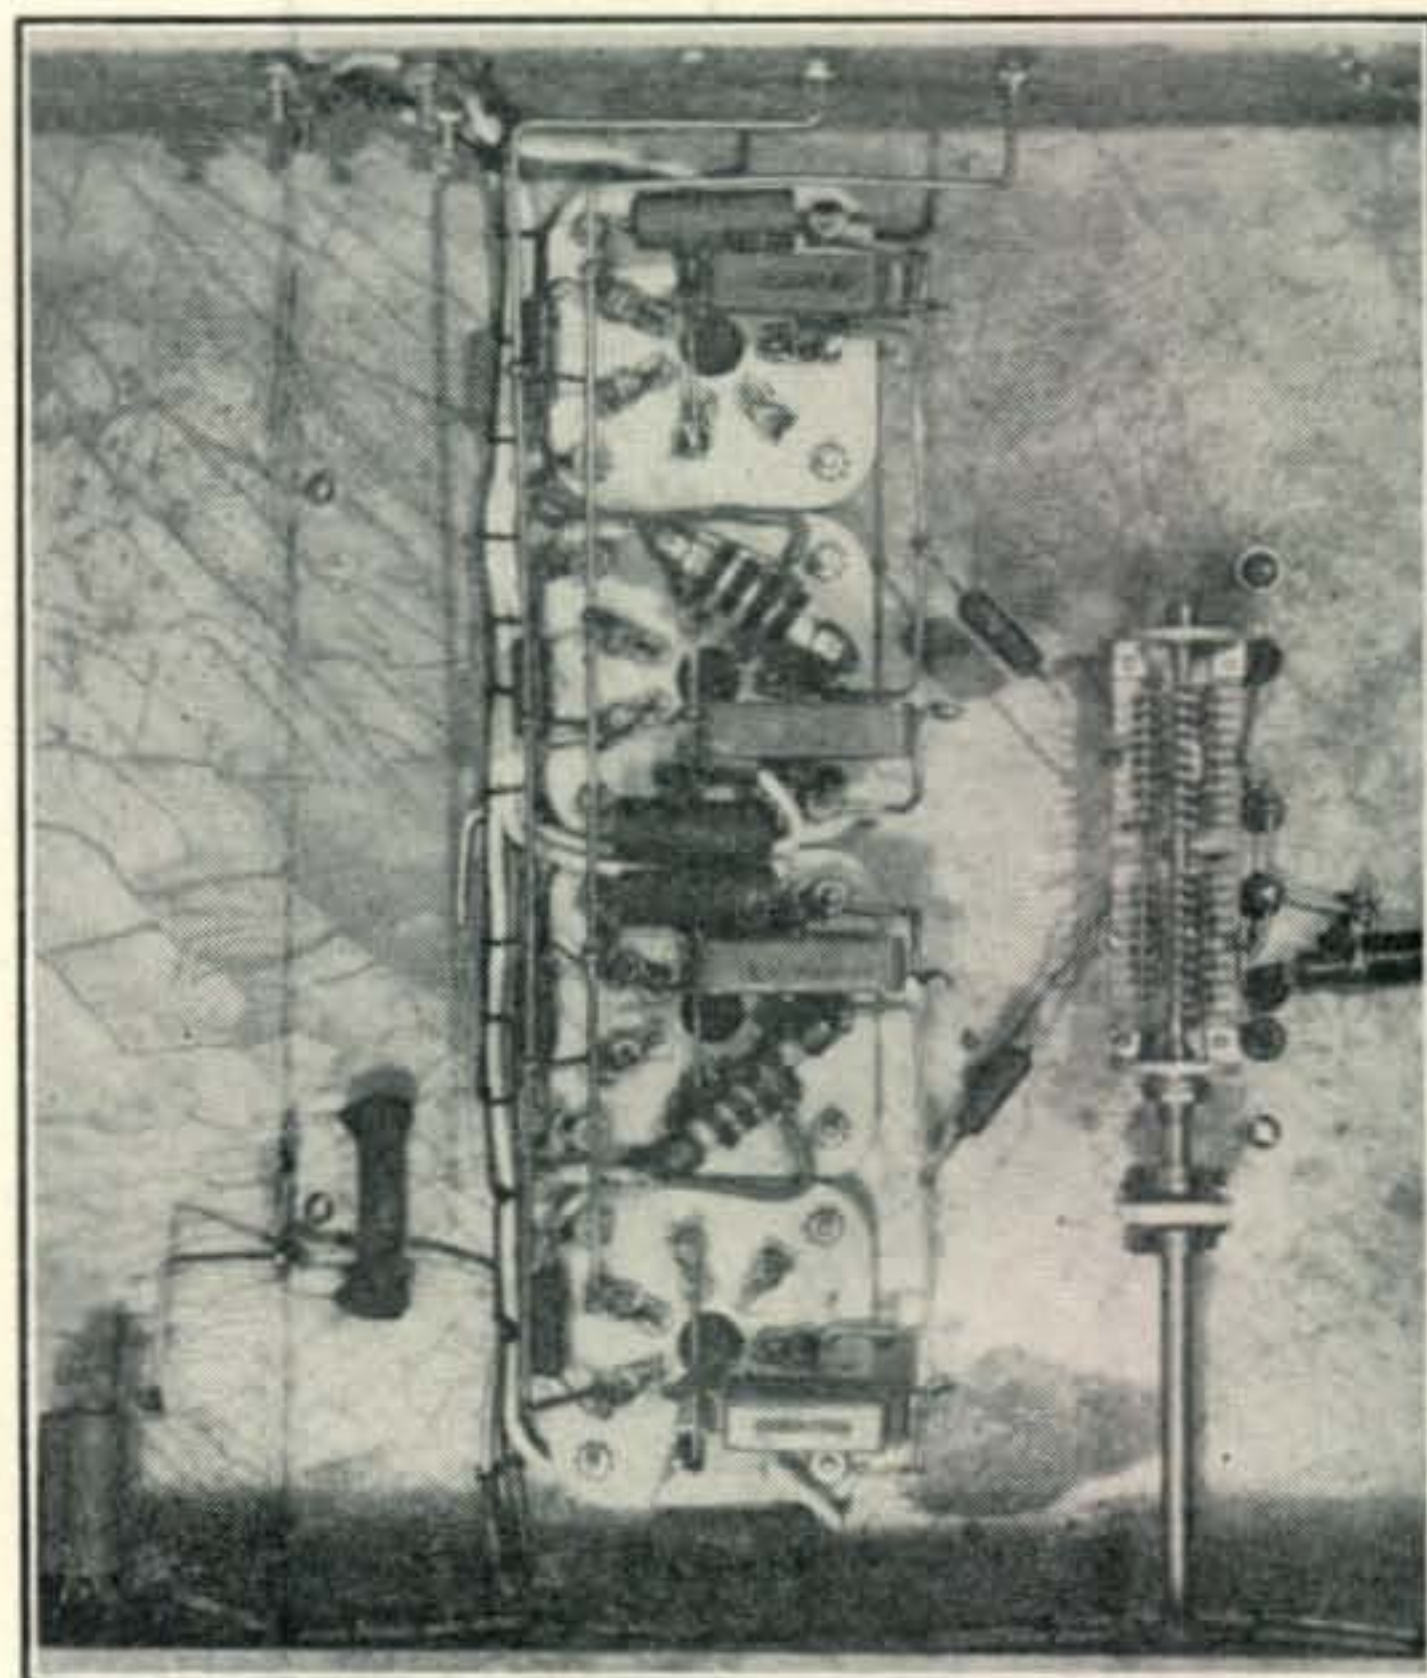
Bottom view of the r-f section of the single-sideband generator. In this view, the grid-trimming capacitor appears at the right and the grid-current switch at the left.
